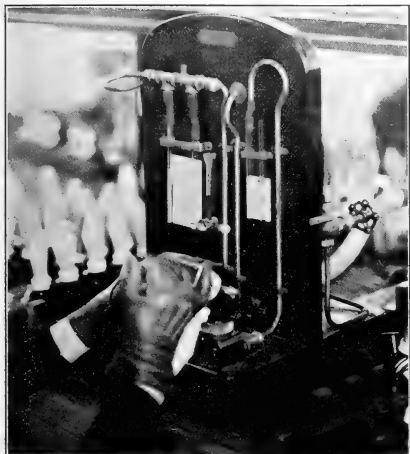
FLUTTER VALVE LEAKAGE-TESTING APPARATUS.
